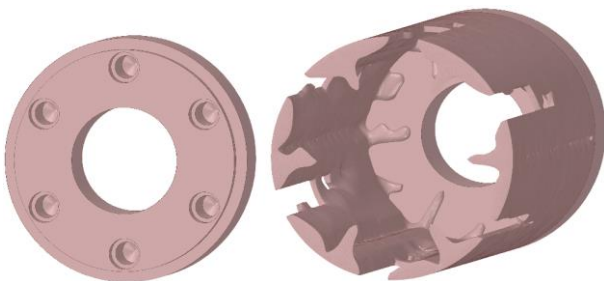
Optimized arm shape with weight 0.139 kg (shown in an exploded view to see the inner shape).
